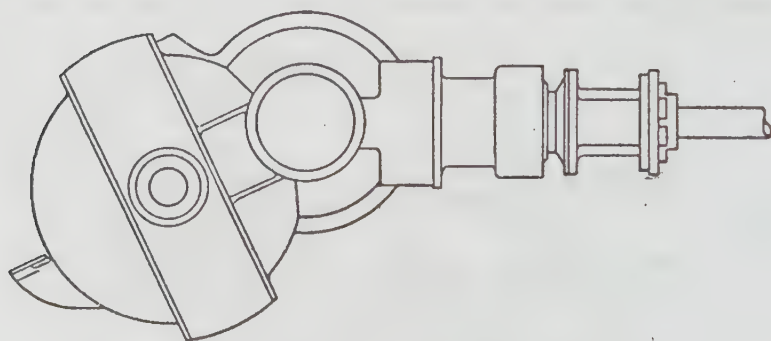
WOLSELEY BEVEL-SPUR DRIVE AXLE.
